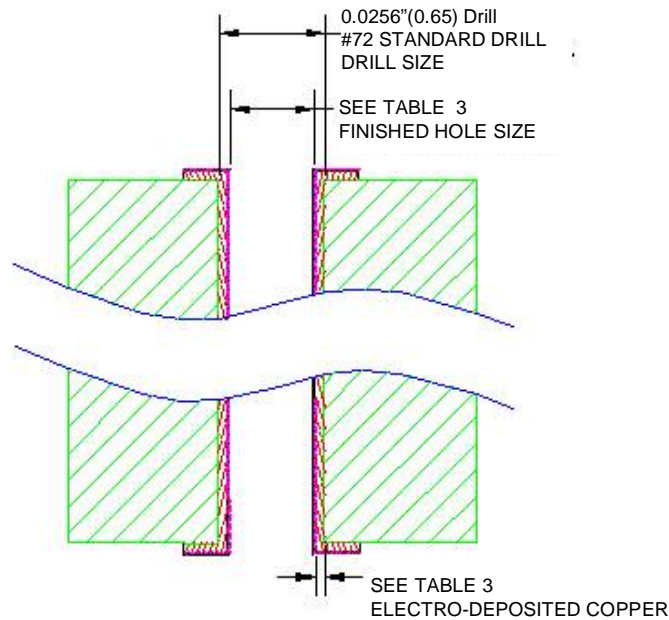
VIPER Drill and Finished Hole Size for Backplanes
